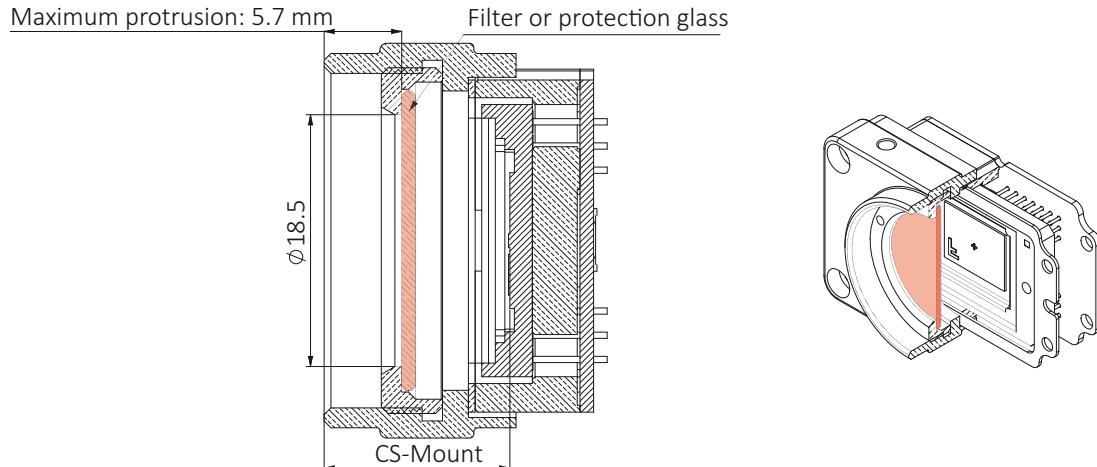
Manta type B CS-Mount dimensions (22 mm filter)
